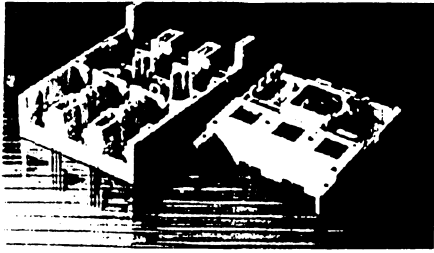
BMC circuit breaker housing at Moeller, Bonn [11] made by Mitras Composites Systems [12] using injection-compression moulding
